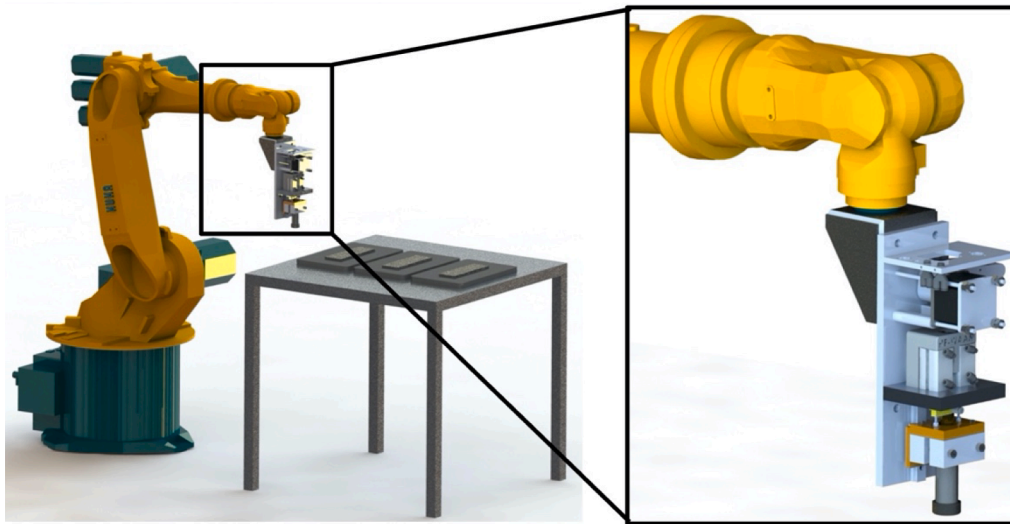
HF-WAAM torch mounted on a bracket along an axis parallel to the robot flange axis (axial torch mounting – ATM).
